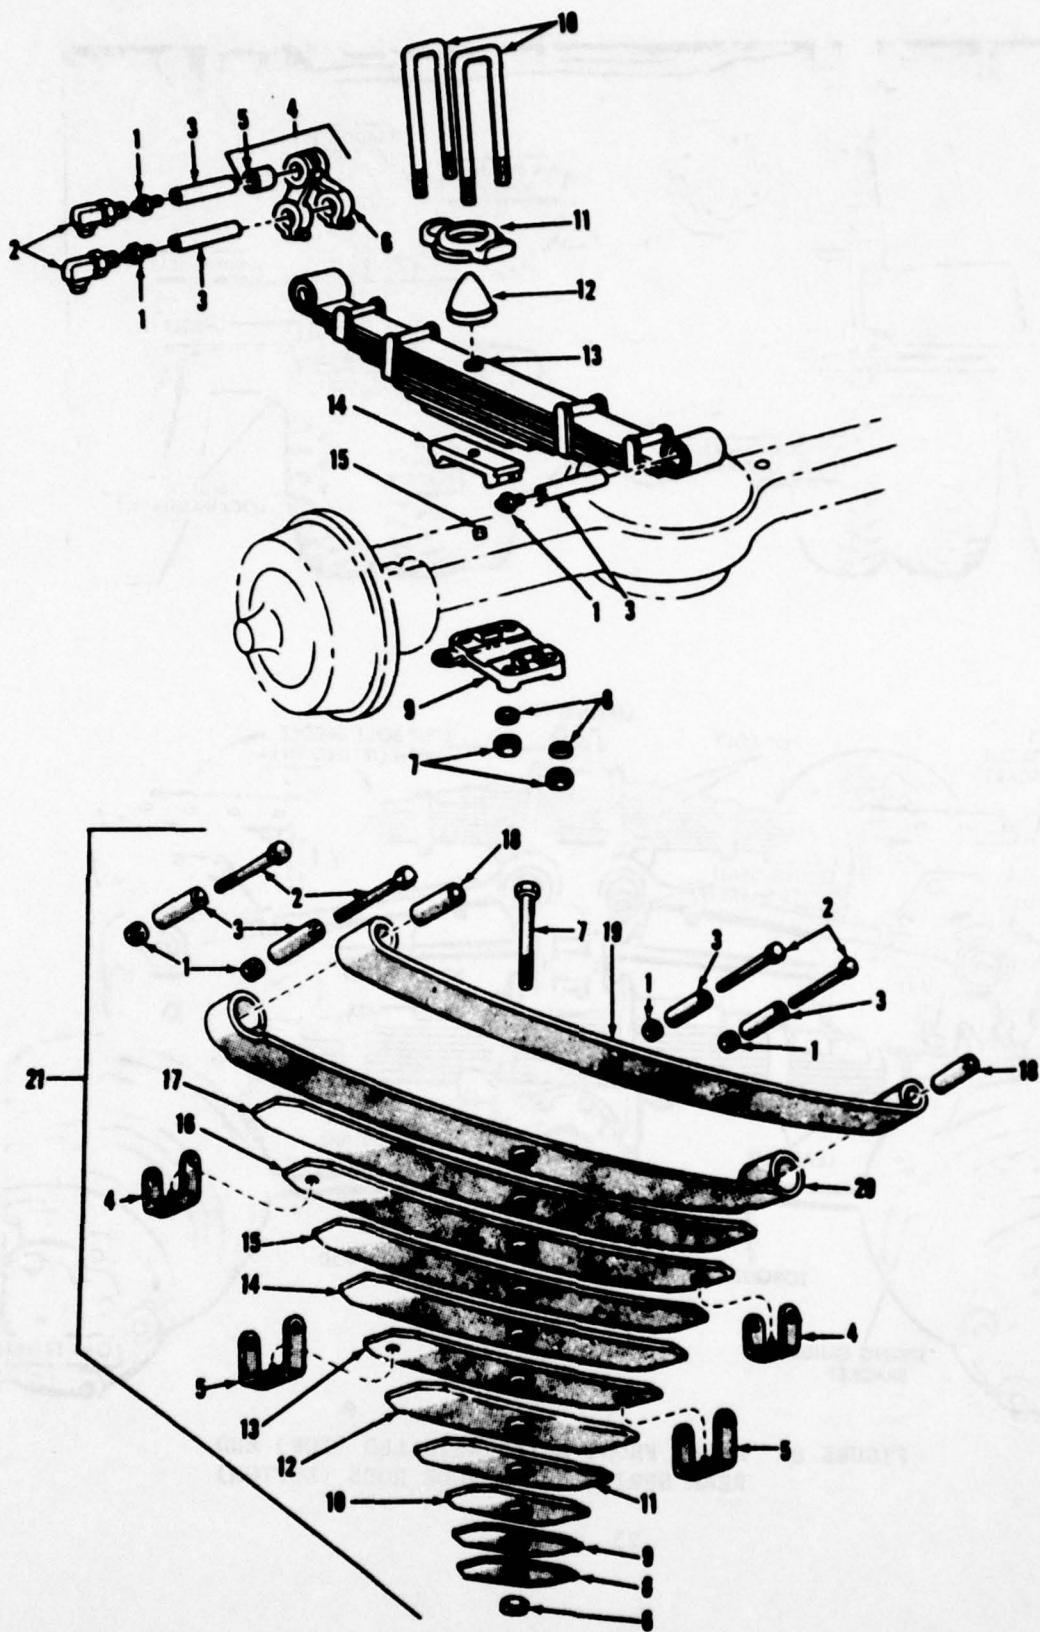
M35A2 FRONT SUSPENSION AND SPRING ASSEMBLIES
